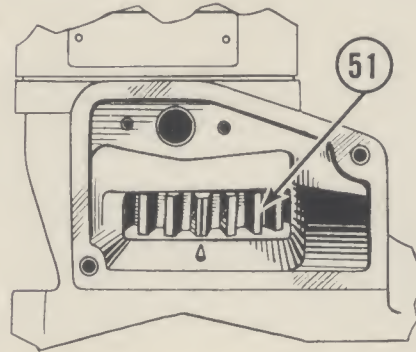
Pump is phased to fire number one cylinder when the marked tooth of plunger drive gear (51) is approximately in register with the "O" mark or arrow on timing window ledge as shown.
